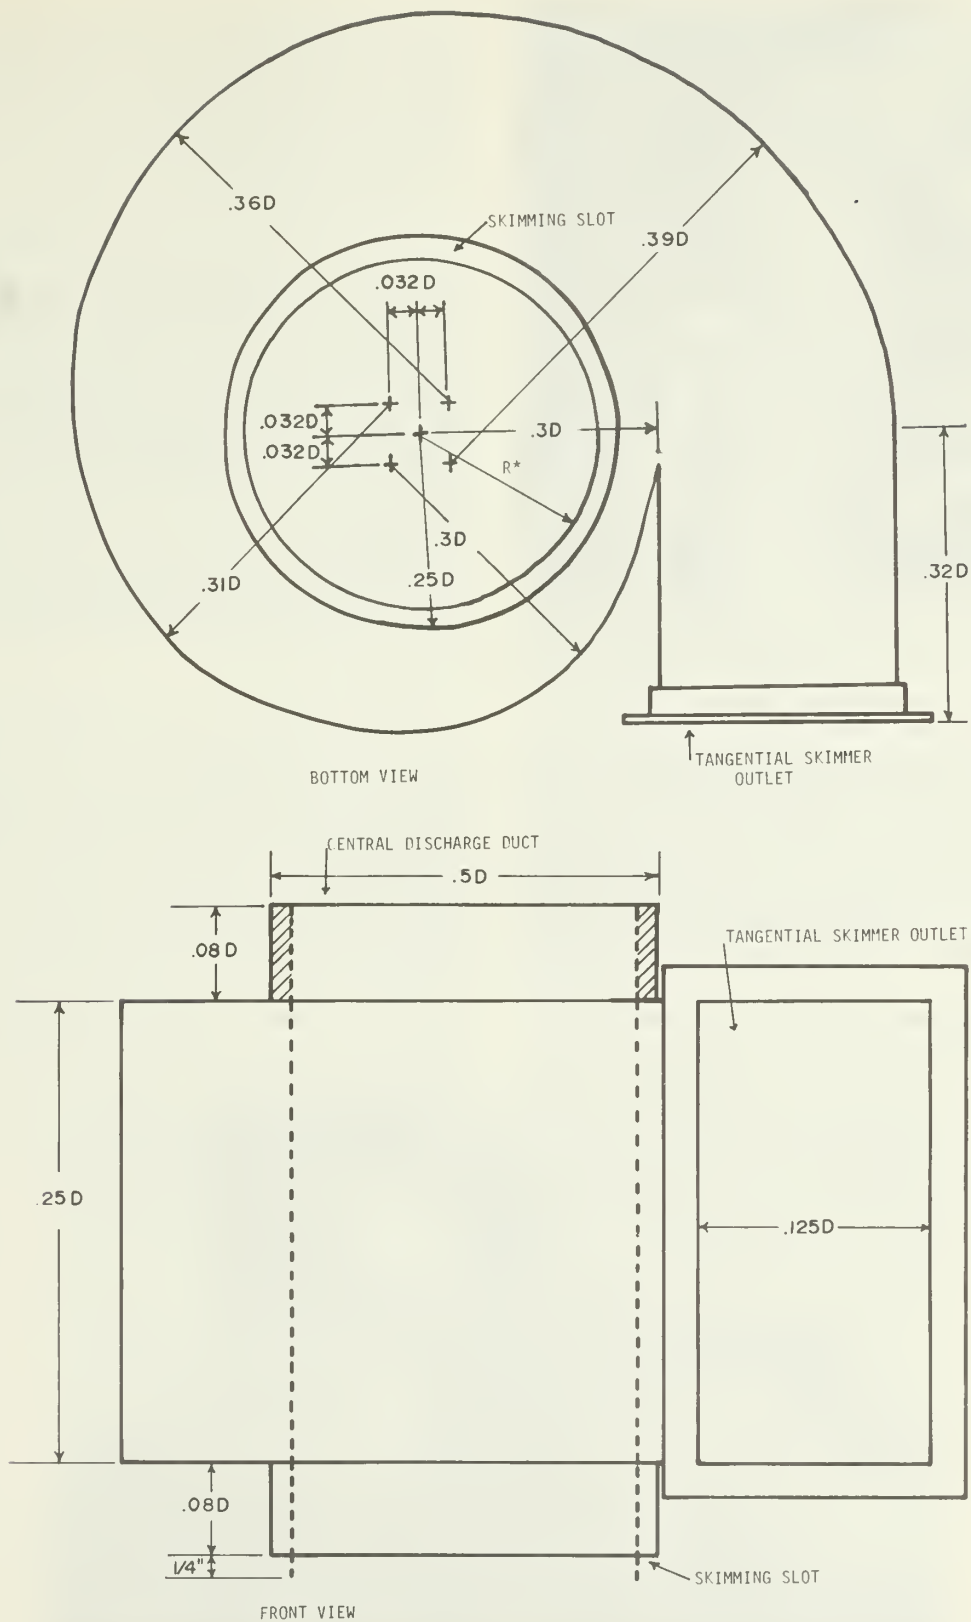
Involute skimmer, dimensions as a function of cyclone diameter. *Note: This dimension is the radius required to give the desired skimming-slot width.
